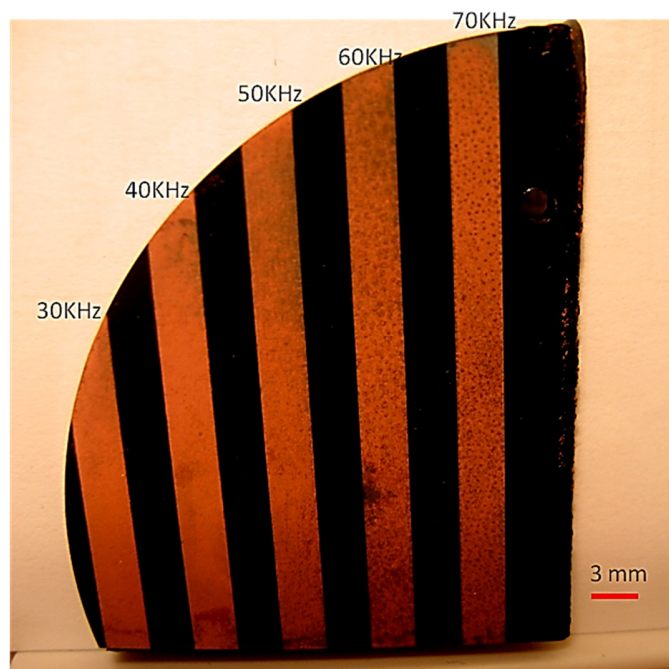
the workpiece with laser tracks made by a UV laser. The used Q-switch frequency is marked above each track.
